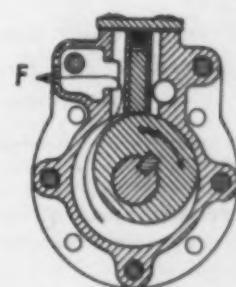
With Rotor in Position Shown, the Air is Exhausted Through the Ports
